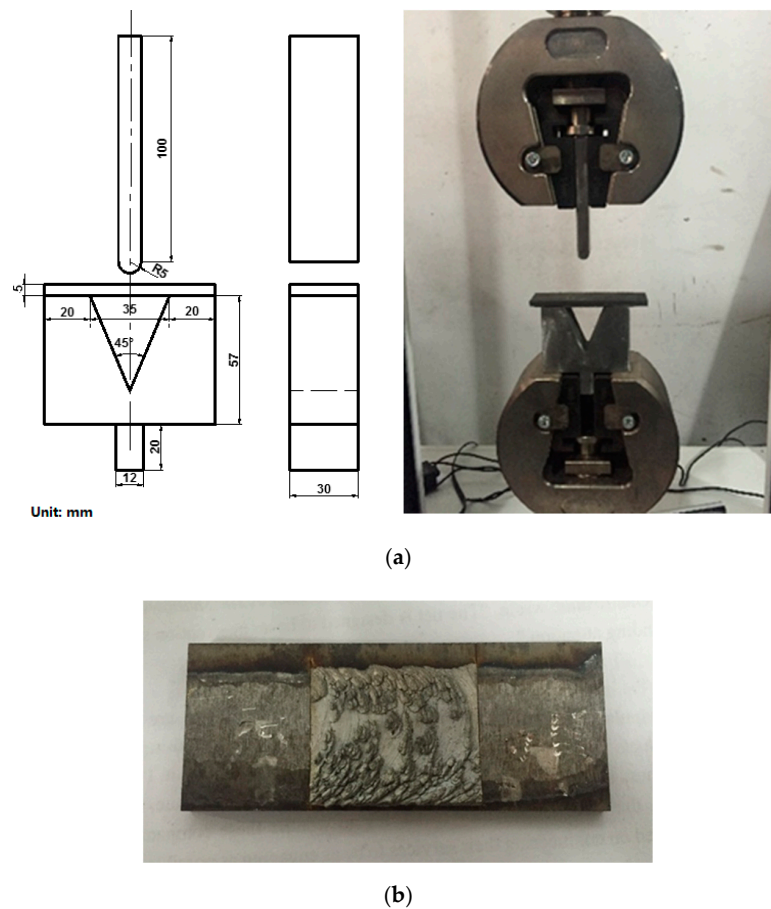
Bending test: (a) test setup; (b) bending specimen.
